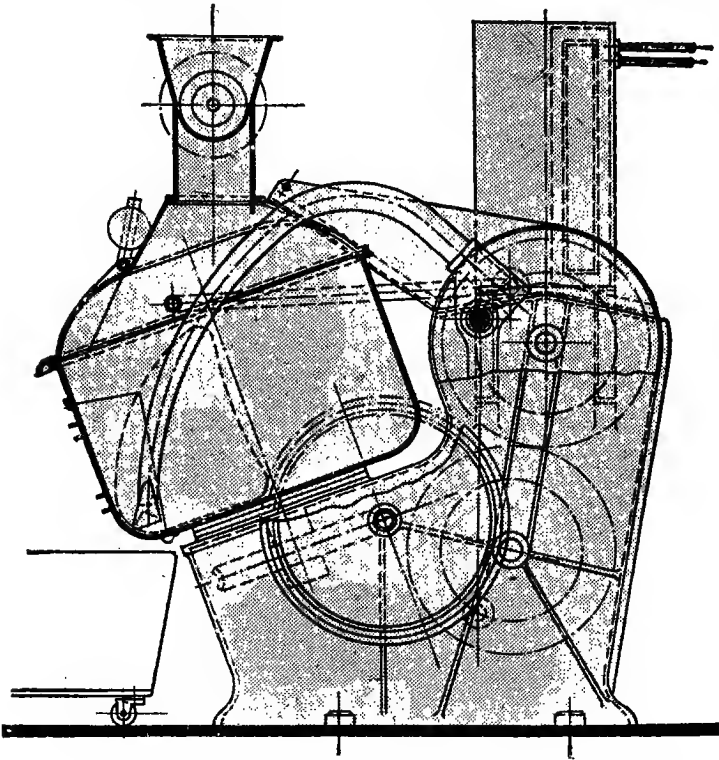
“Viennara” Kneading Machine. Sectional Diagram.
